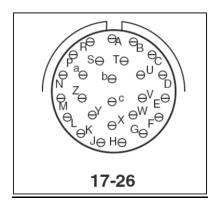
HLD Multi-pin Connector Insert Arrangement
